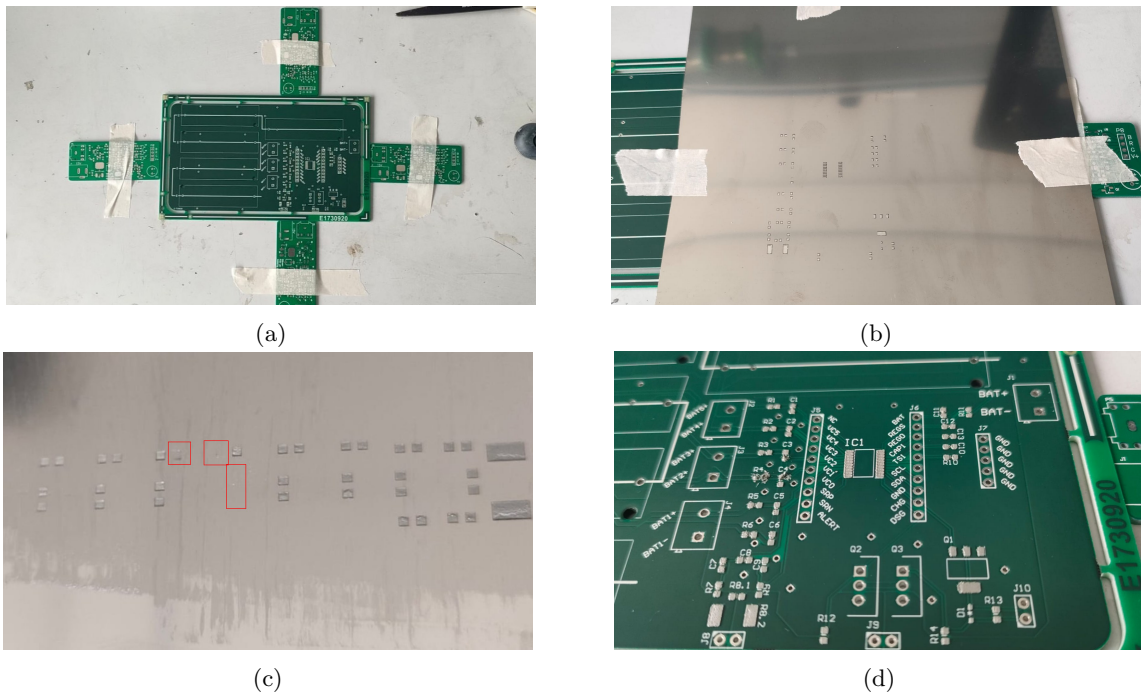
(a.) Clamping the PCB to the table. (b.) Aligning the top stencil on top of the pcb. (c.) Red markings show the fabrication Error in the top stencil. (d.) Solder paste result after using the top stencil and tweezers.
